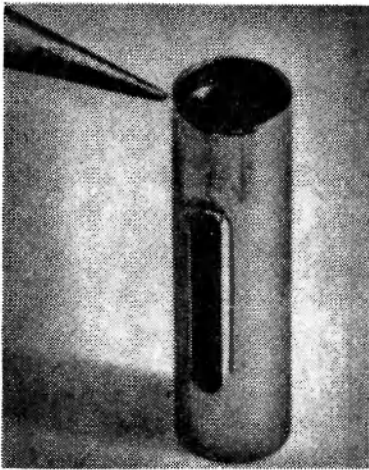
Laser weld of gold sensor package having uniform and gas tight surface.
